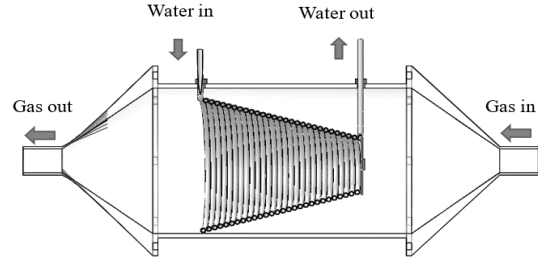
CAD Model of Shell and Helical Cone Coil Heat Exchanger
